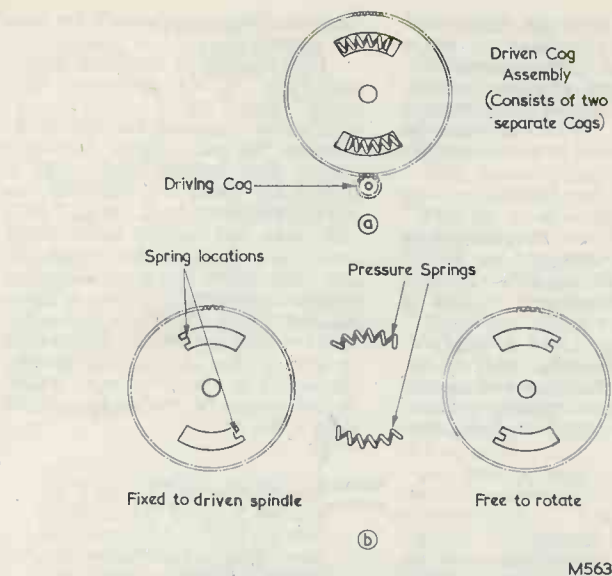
(a). A typical cog wheel tuning drive employing pressure springs in the driven cog assembly.
